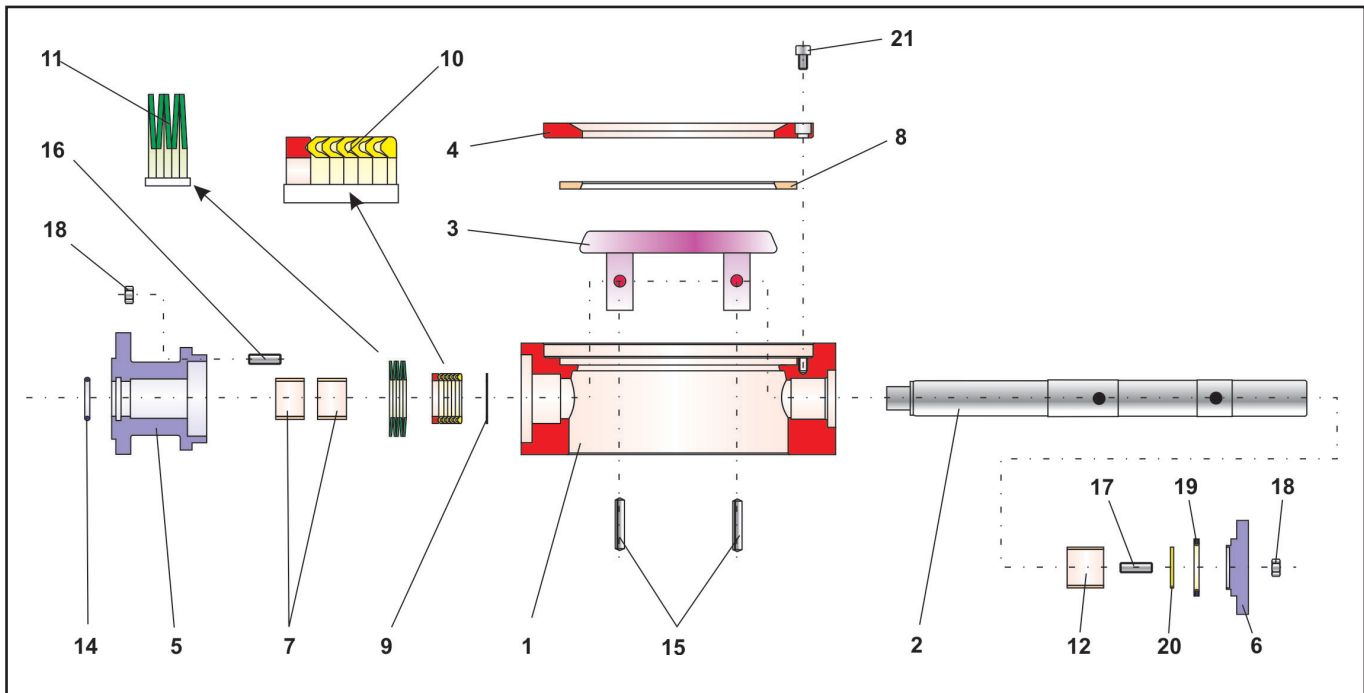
Explosion drawing of butterfly valve, Series 14a
